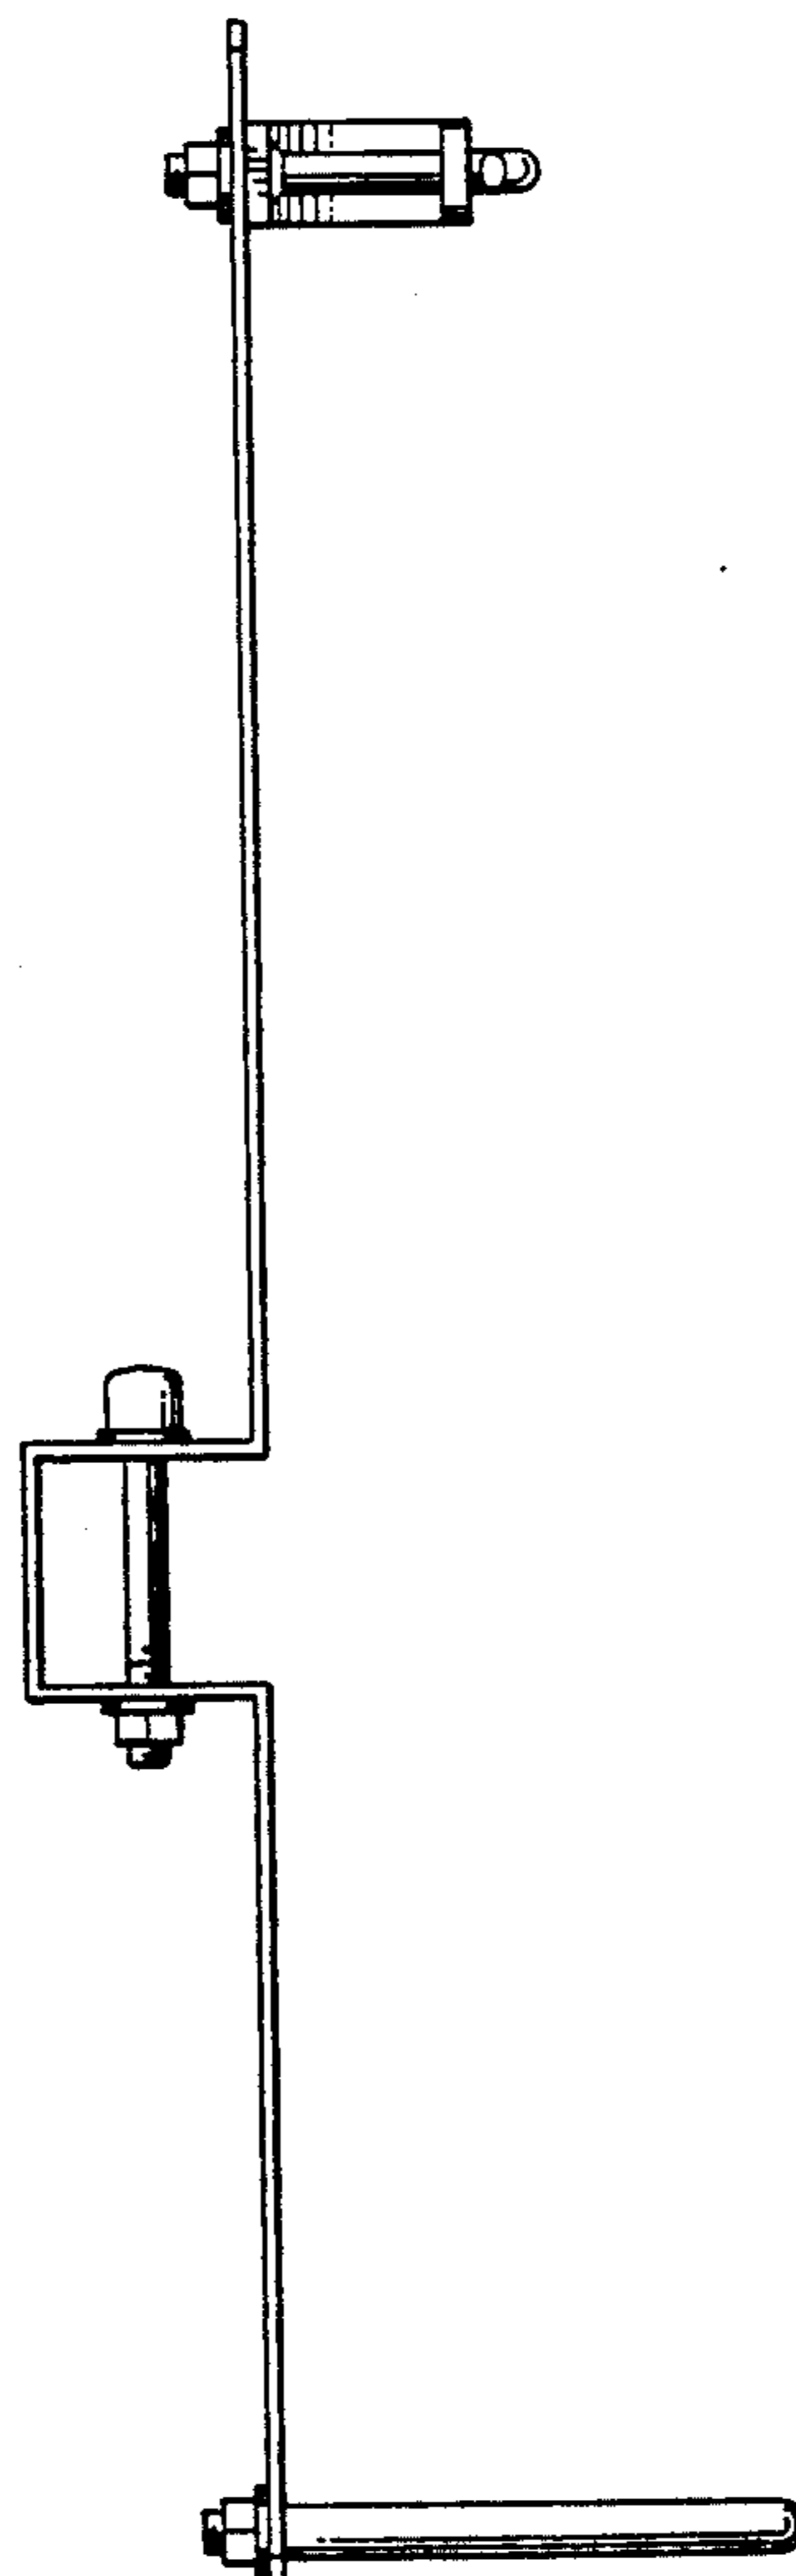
is a front elevation view of a ski carrier attachment for a bike rack showing our new design, the broken lines are for illustrative purposes only and form no part of the claimed design;
